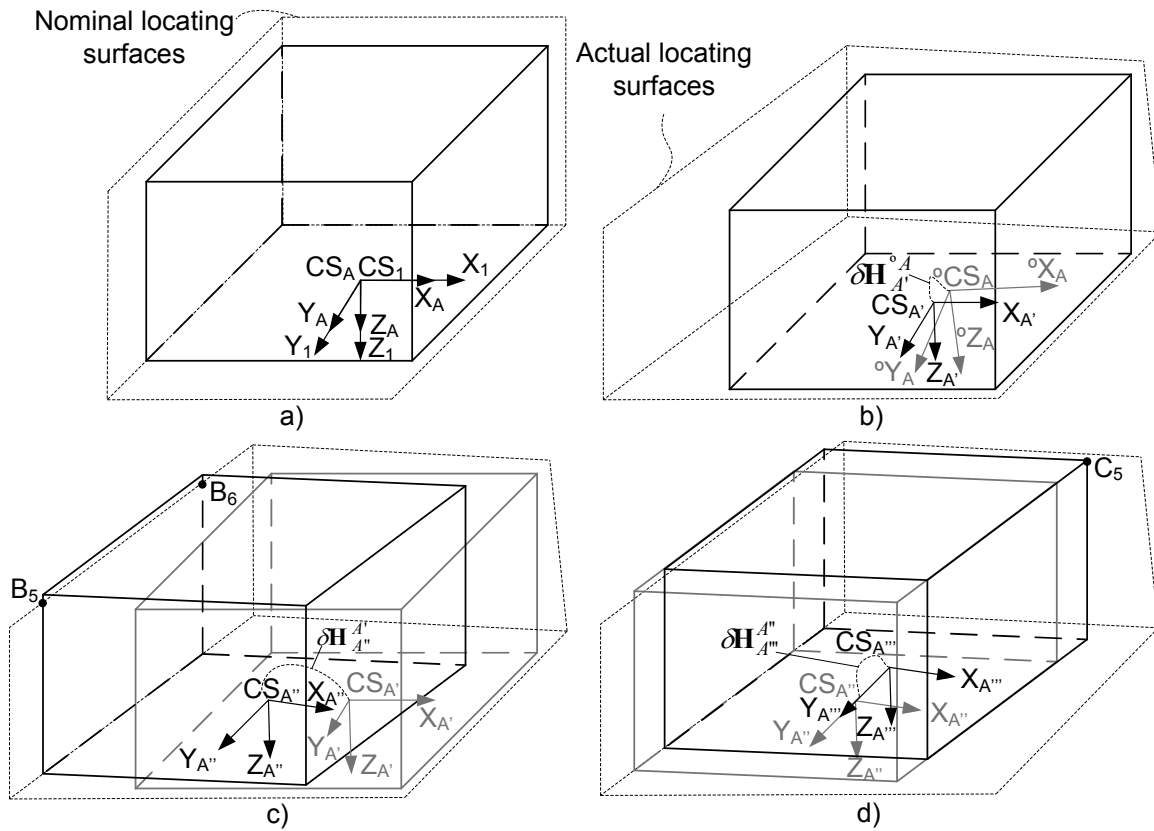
a) Nominal workpiece-fixture assembly. Sequence of small movements for locating the workpiece on the actual fixture over the: b) primary datum, c) secondary datum, and d) tertiary datum.
